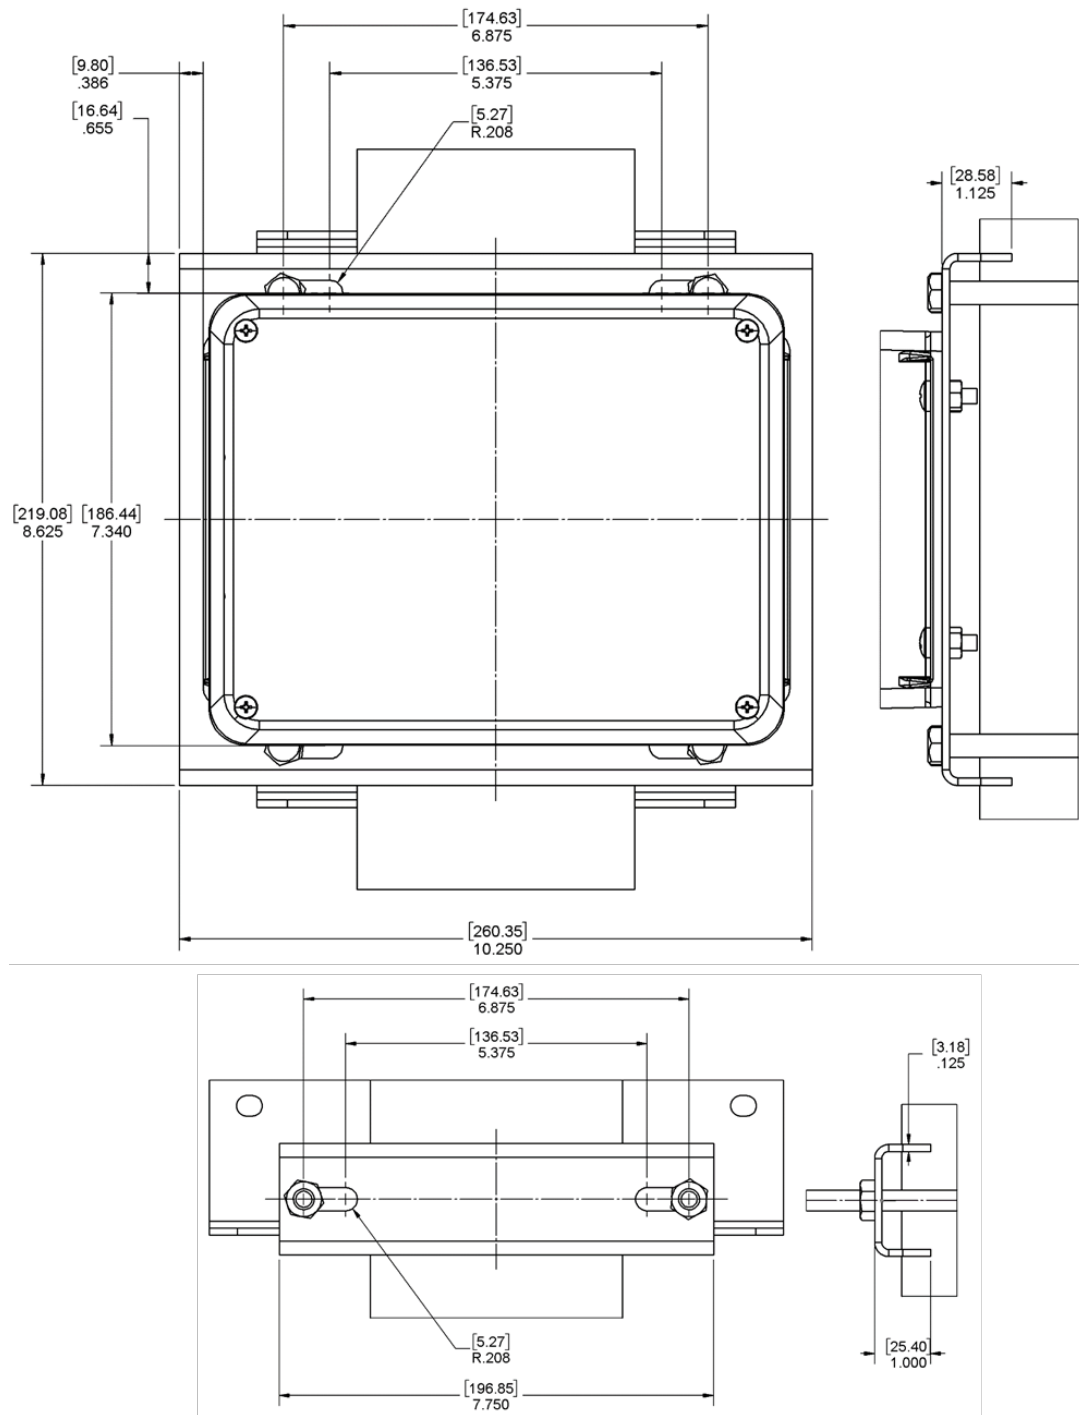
RDE300i mounting clamp (810303) dimensions
